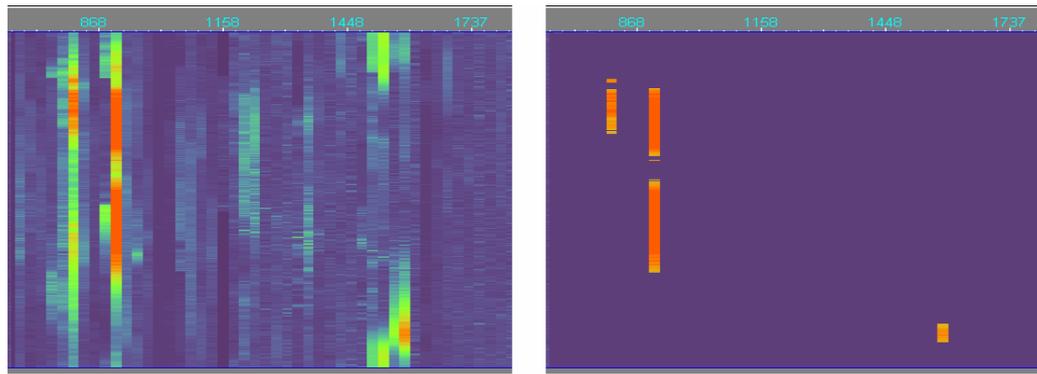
Axle automatic ultrasonic inspection image processing
